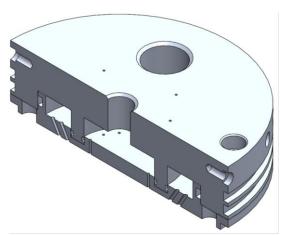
Injector Manifold Assembly. This cutaway shows the fuel orifices (center) and oxidizer orifices (outer). Two o-rings separate the two flow paths of the manifold. Vent holes can be seen on the top face.
